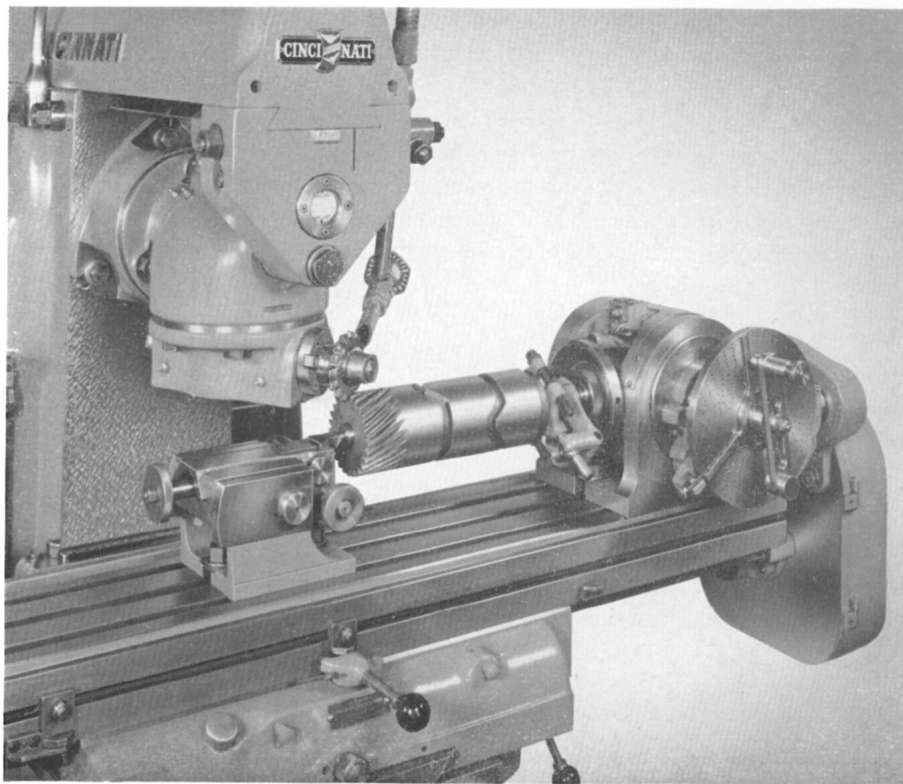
Milling a helical gear on a plain knee-and-column type milling machine equipped with a universal spiral milling attachment and a universal dividing head.
